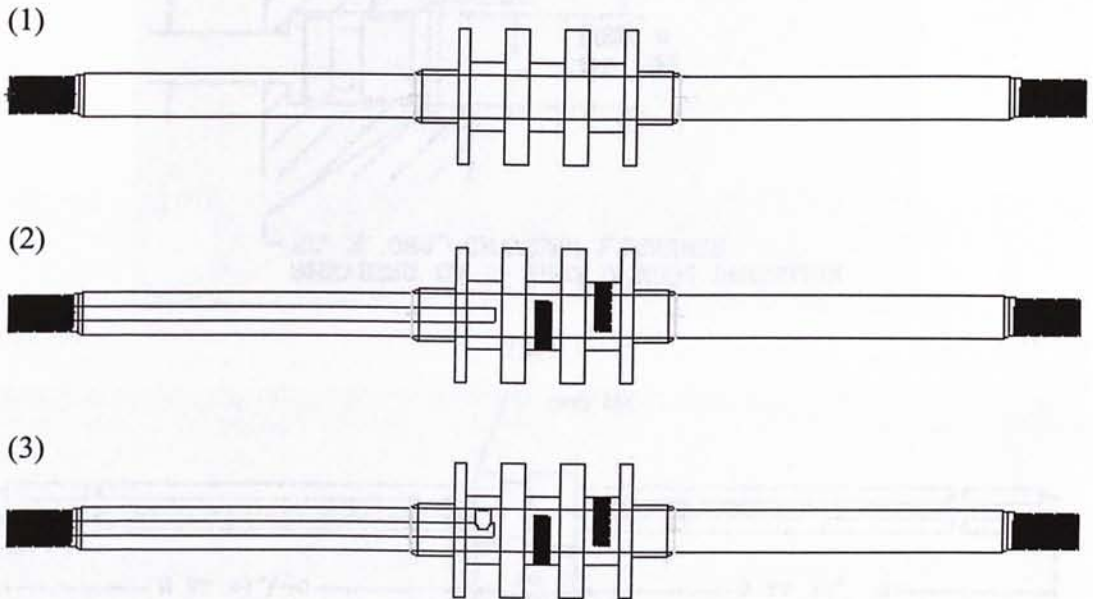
(1) No drilling is made (2) Drill a deep hole at the center of the piston
